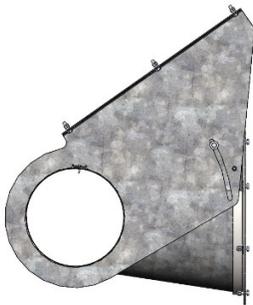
Hopper Transition Fan Mount Assembly 18inch
